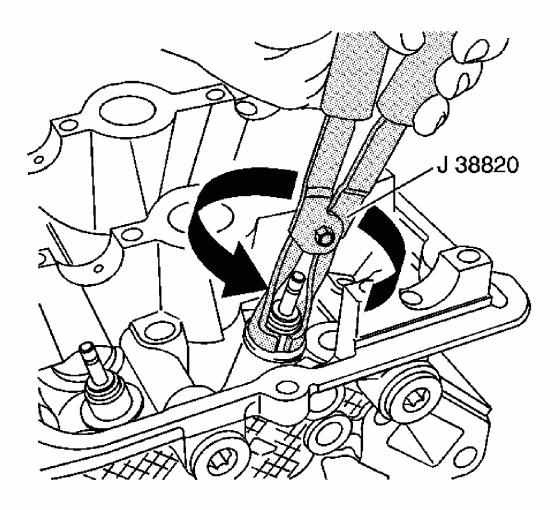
Using J 38820 To Replace Valve Seal Courtesy of GENERAL MOTORS CORP.
